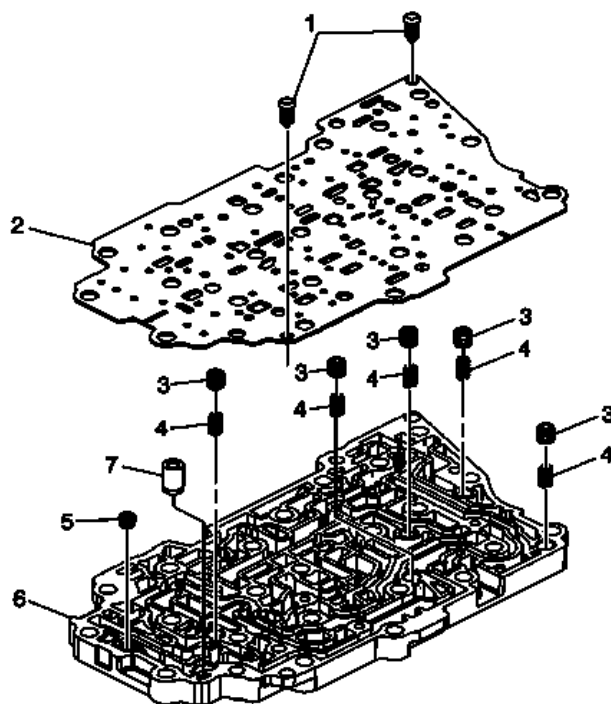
Control Valve Channel Plate Cleaning and Inspection
